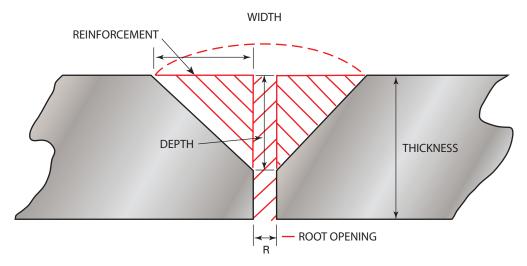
Calculation of weld requirements depending on joint design.
